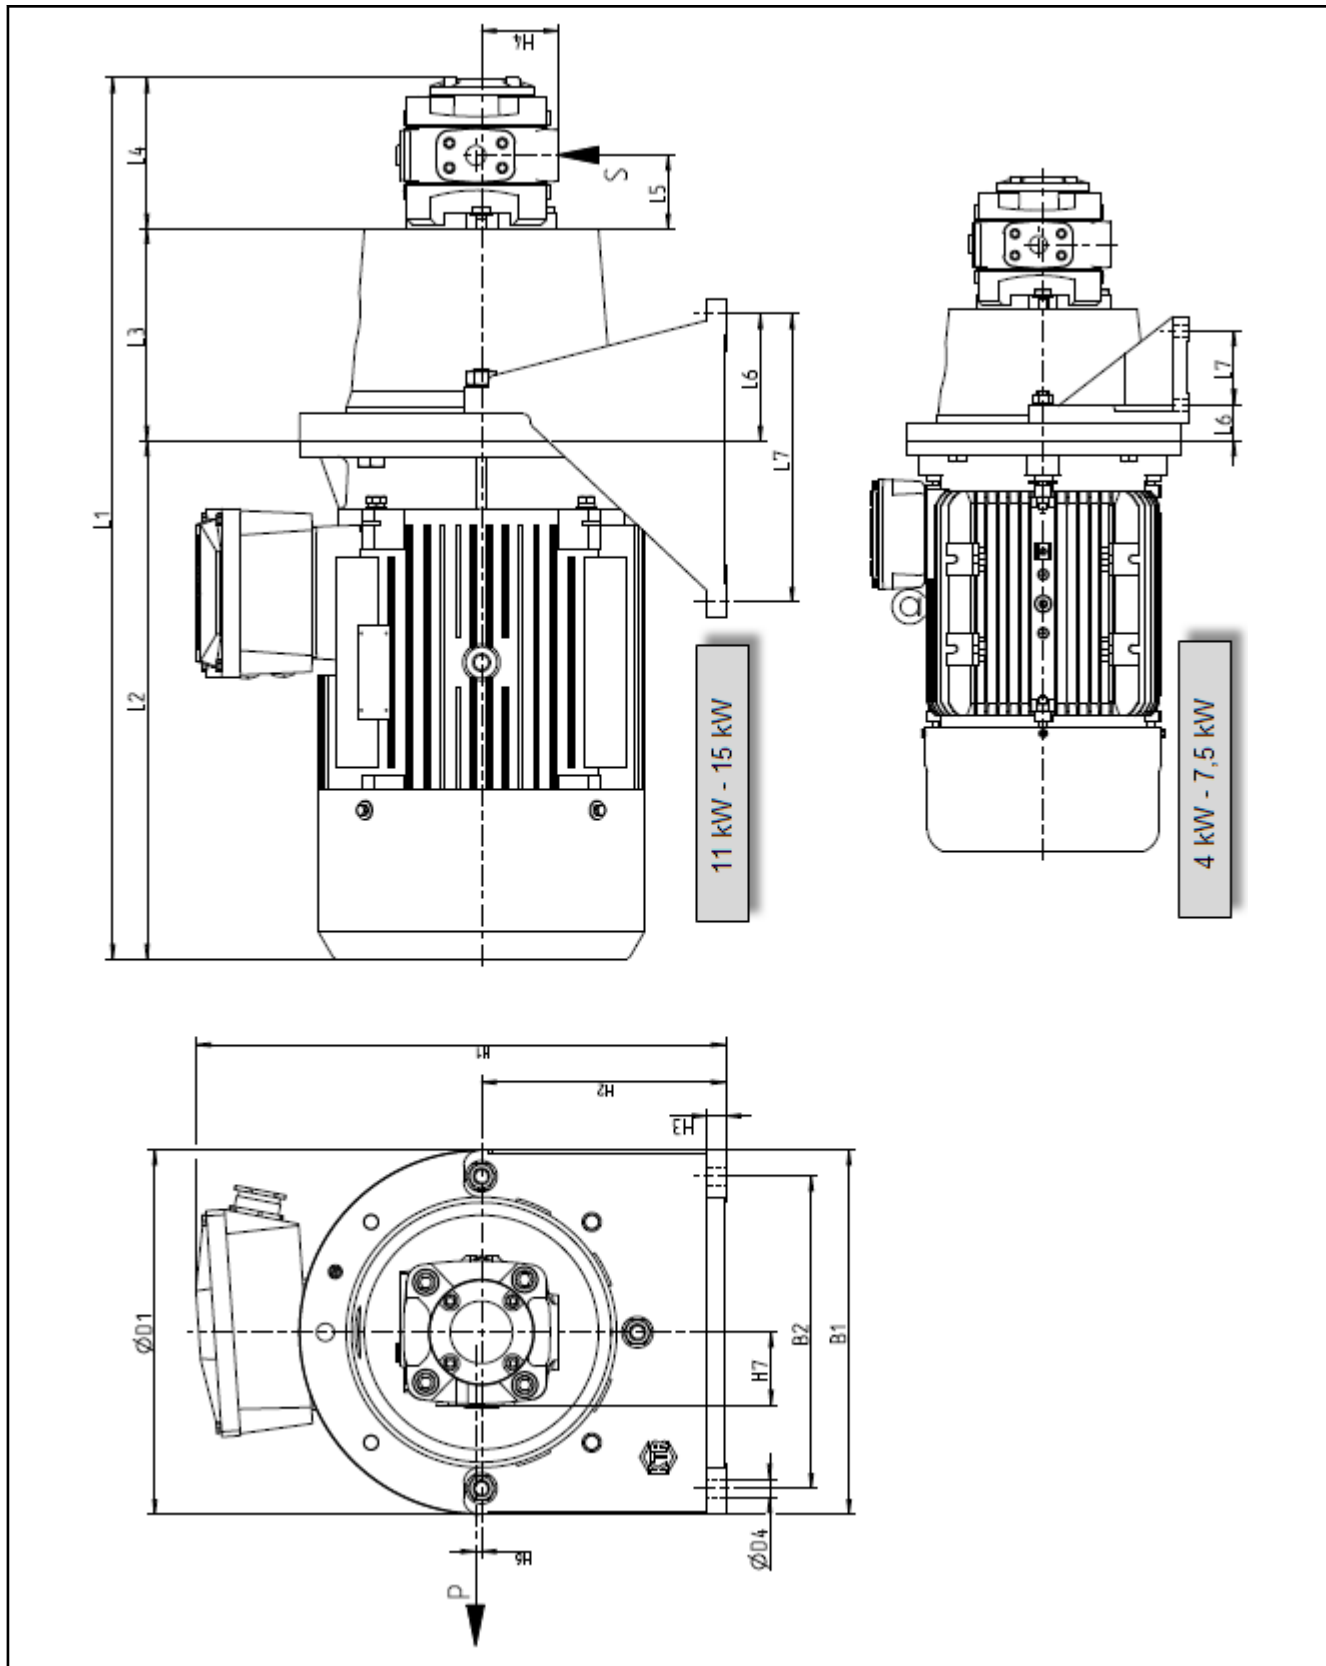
Dimension sheet "MPES2" with "PGH4" in the fastening mode "B" (horizontal foot fastening)
